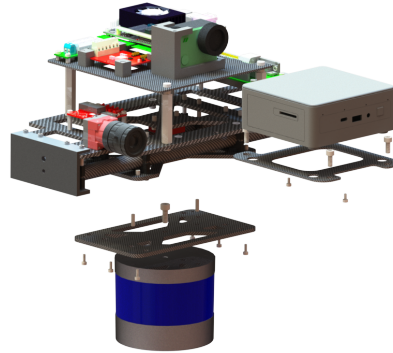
Exploded view of payload showing the removable plates for the NUC computer and the LiDAR
